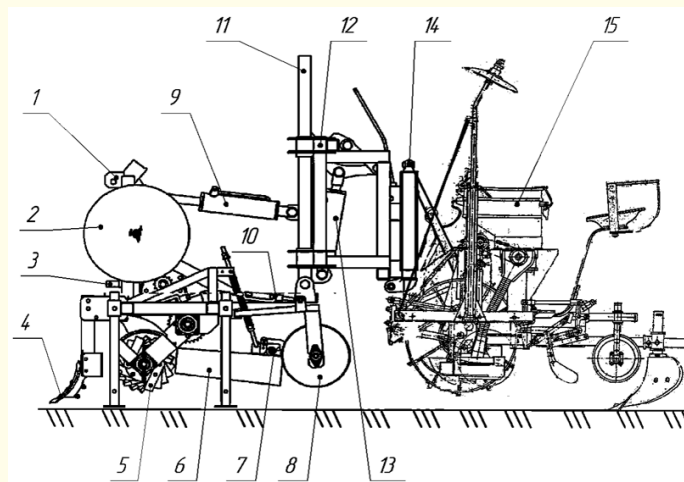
Combined unit for pre-sowing strip milling with simultaneous laying of drip irrigation hoses and the possibility of sowing: 1 - cutter frame; 2 - reel of drip irrigation hoses; 3 - cutter drive gear shaft; 4 - hiller ripper; 5 - knife drum of the cutter; 6 - apron of the comb of the educator; 7 - hose laying mechanism; 8 - compaction roller; 9 - hydraulic cylinder for folding the attachment bracket; 10 - lanyard for adjusting the compaction roller; 11 - automatic coupler bracket; 12 - automatic coupling carriage; 13 - hydraulic cylinder of the automatic coupler carriage; 14 - automatic coupler; 15 - seeder; 16 - fields; 17 - gearbox.
